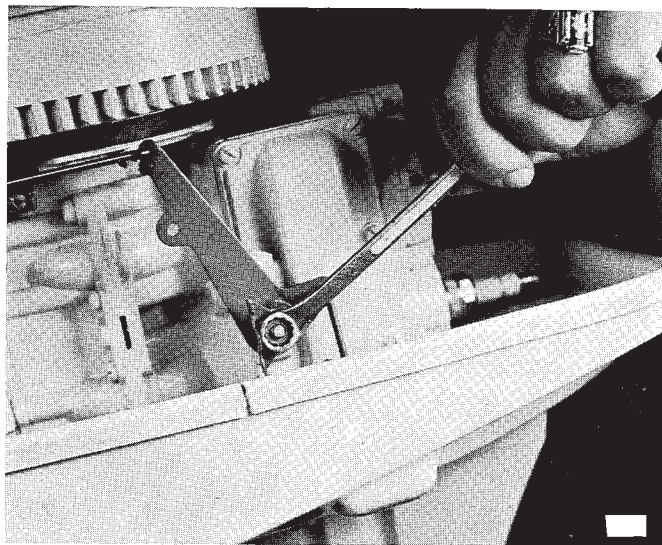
MAGNETO CONTROL LEVER ASSEMBLY
